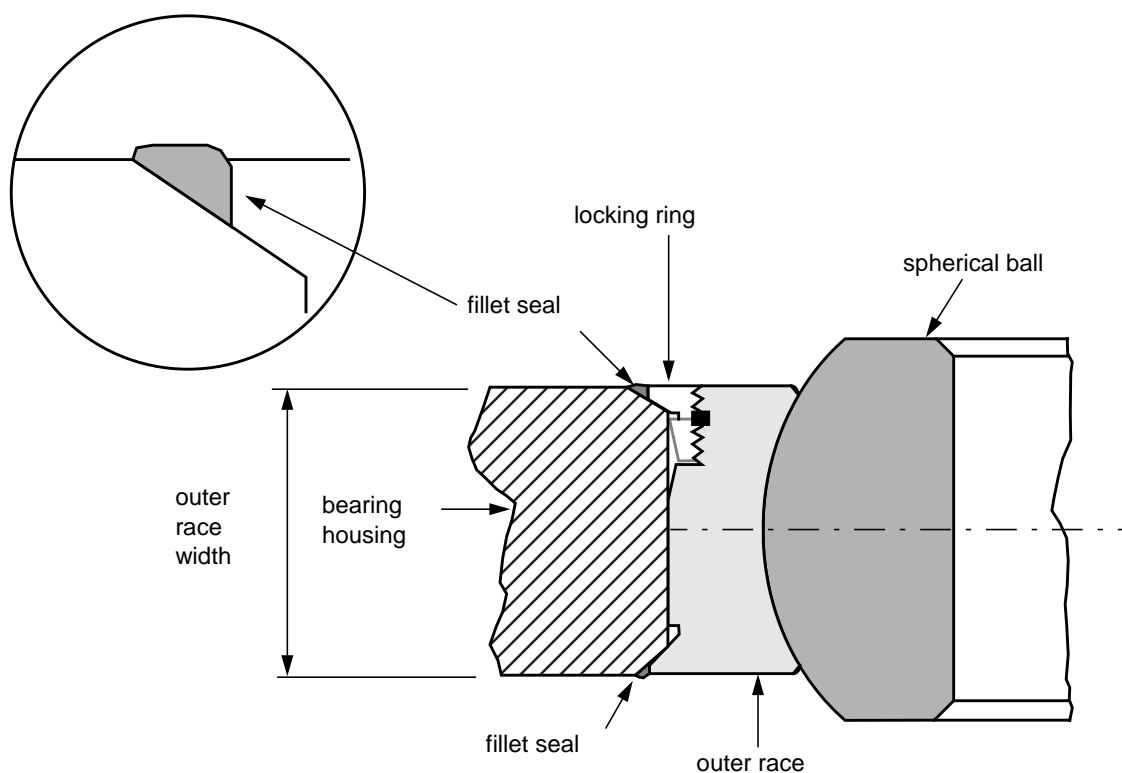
Fillet Sealing of Bearing and Housing Assembly
